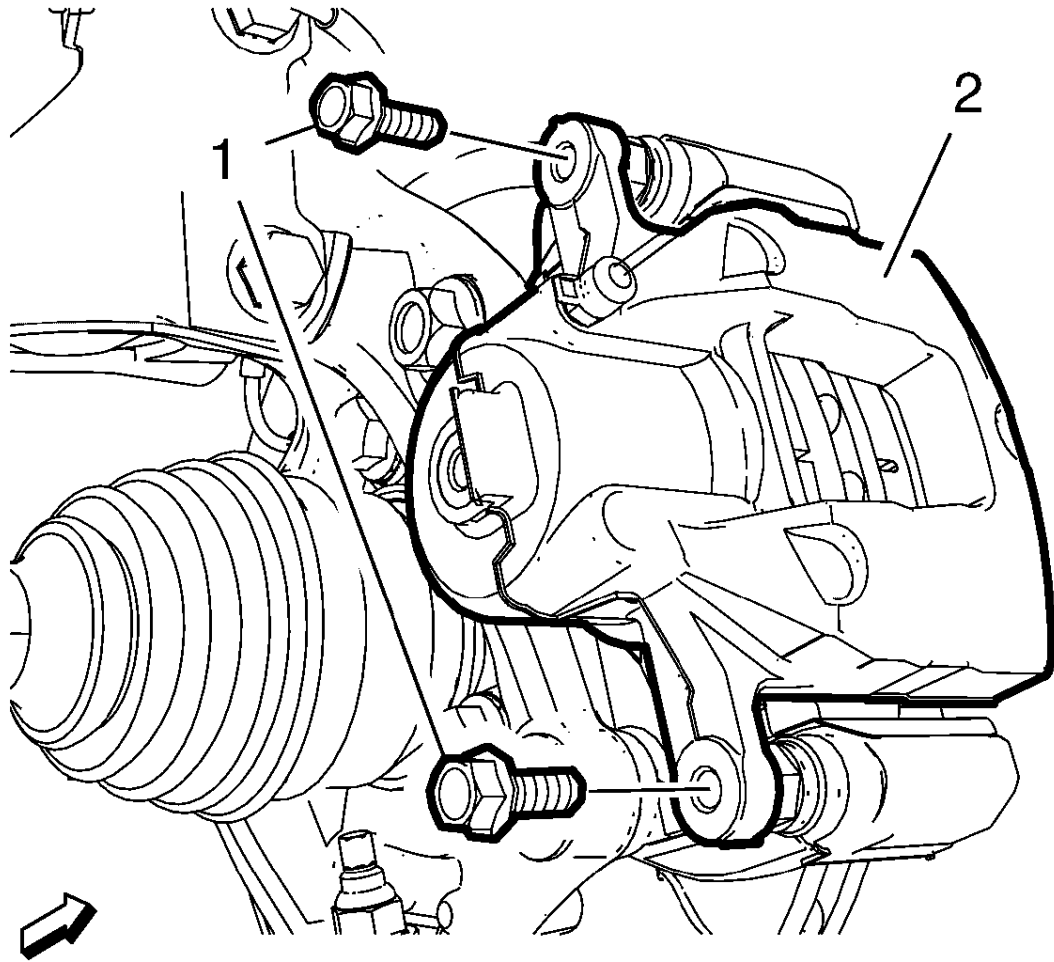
Brake Caliper Guide Pin Bolts And Front Brake Caliper
